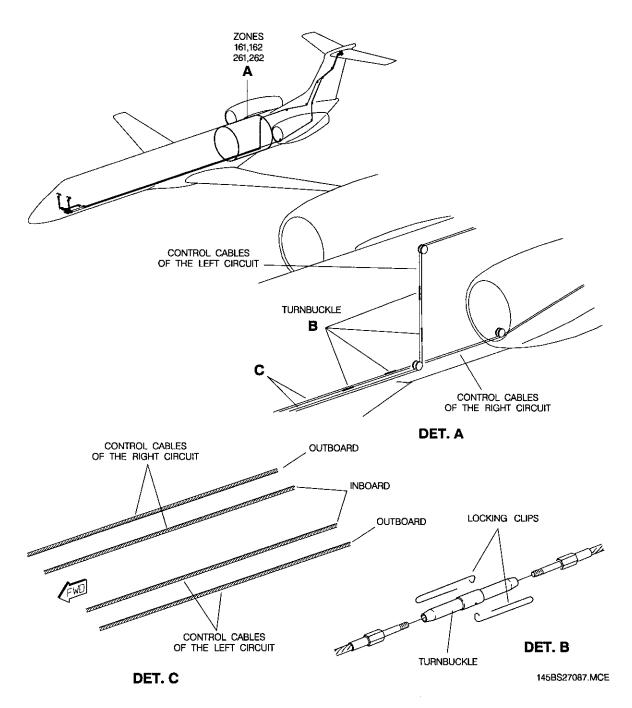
ELEVATOR CONTROL CABLES ADJUSTMENT (SHEET 1 OF 1)
